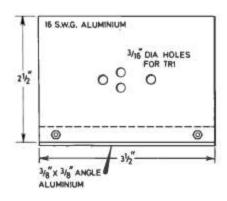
(above) The dimensions of the heatsink for TR1. Fig. 4. (left) The dimensions of the front panel showing positions of holes and cut-outs for mounting the components.
